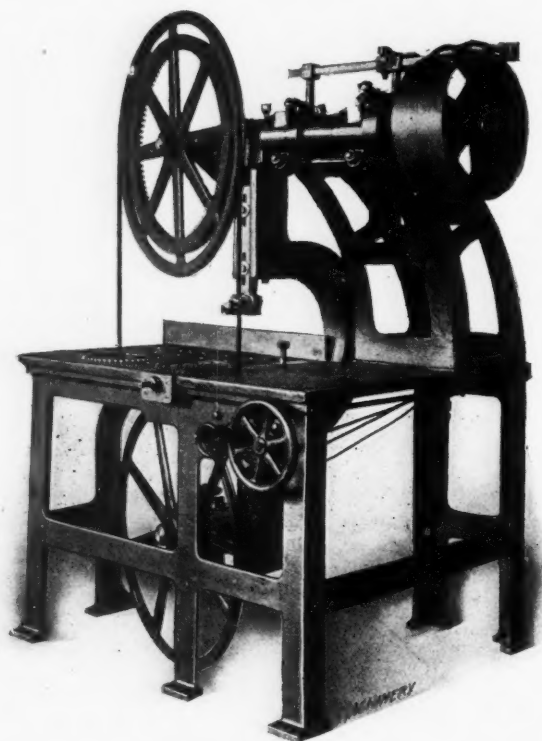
Houghton & Richards Cutting-off Machine engaged on Die Work
